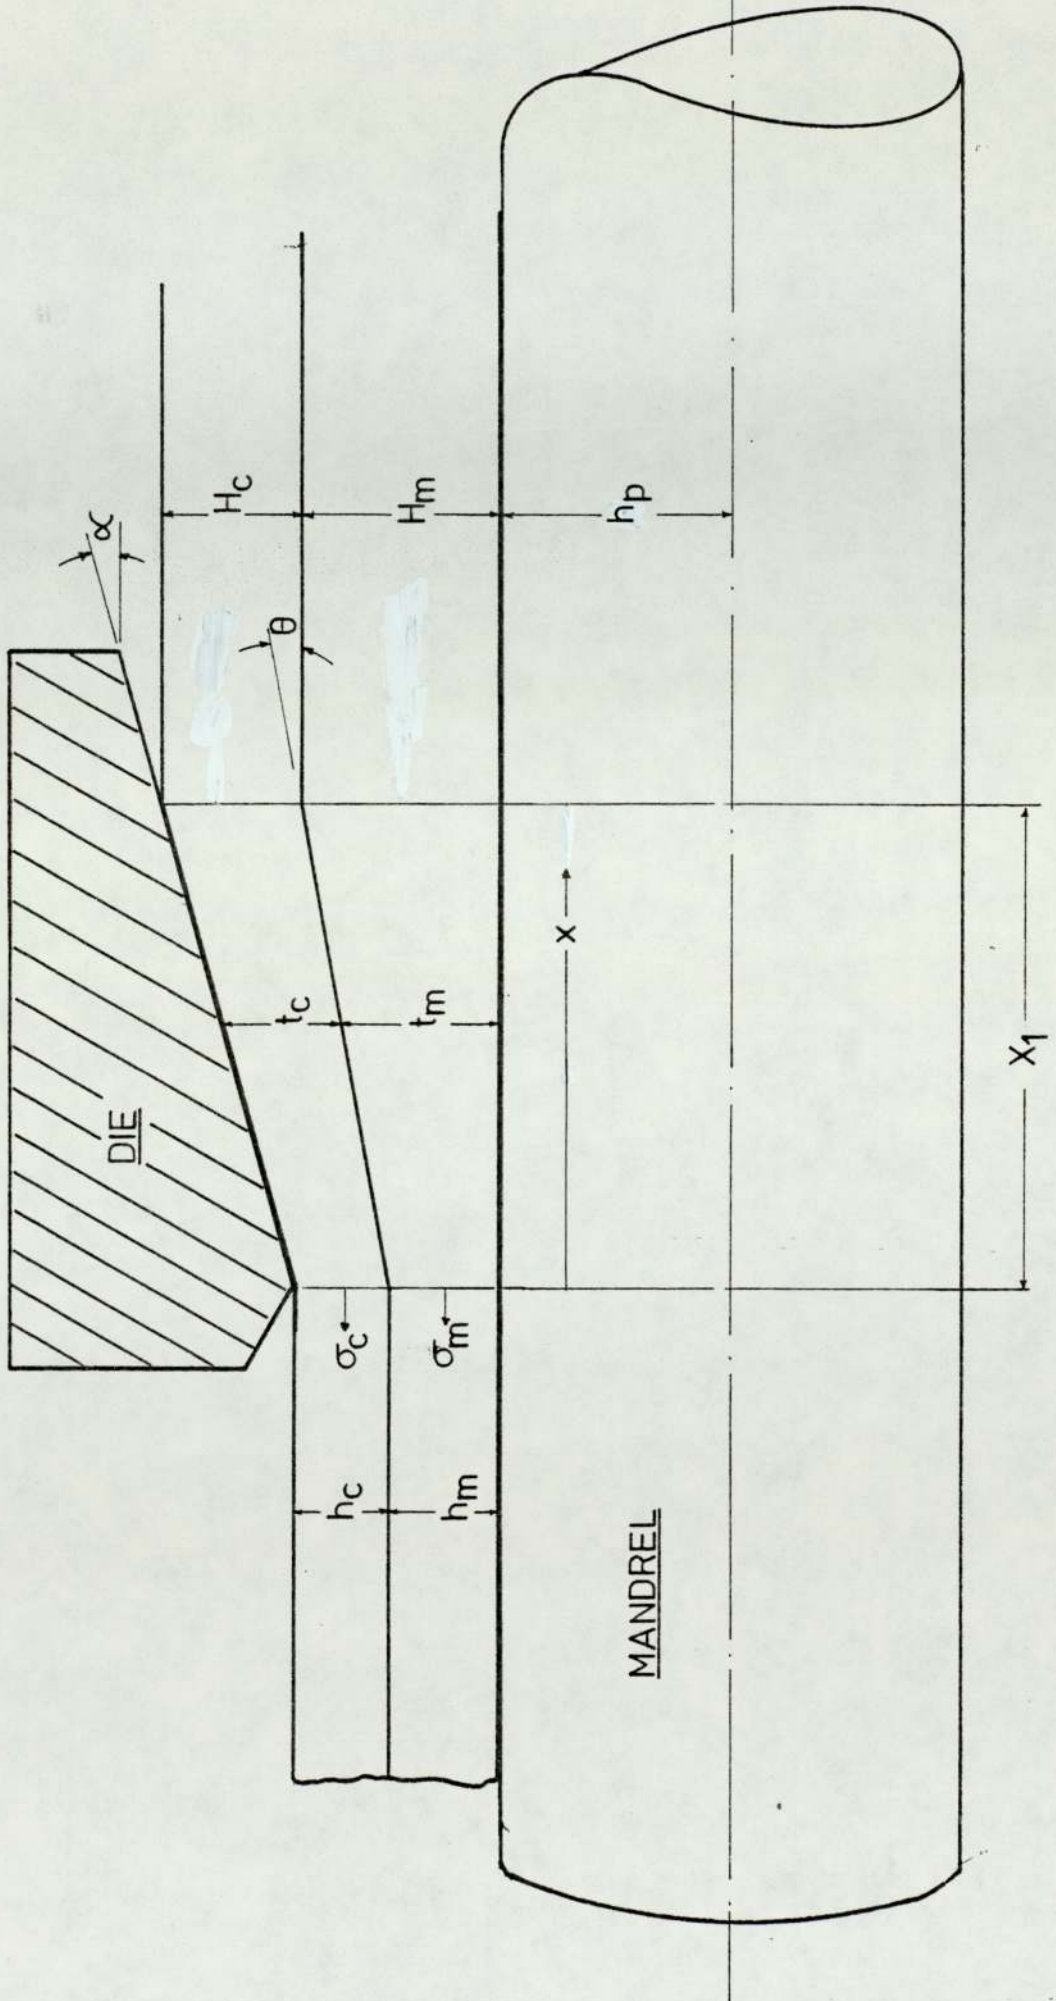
CLOSE-PASS BIMETAL TUBE DRAWING ON A MANDREL
